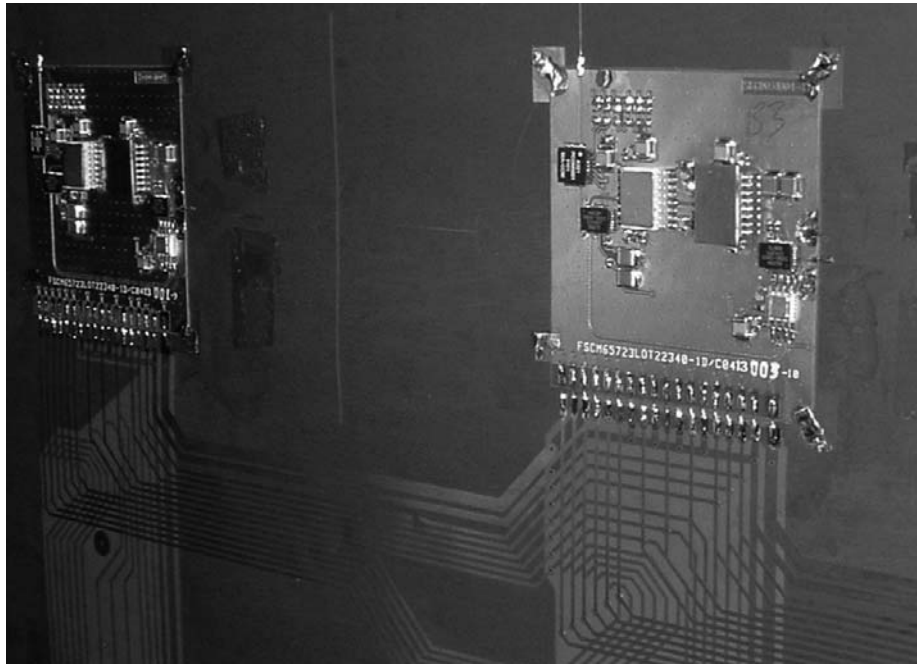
Close-up view of the membrane array showing T/R module components.
